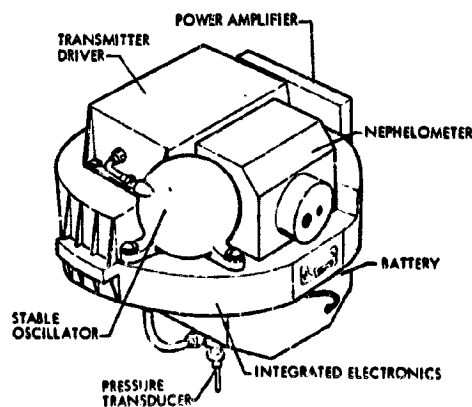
Equipment Mounting Shelf, Thor/Delta Small Probe
